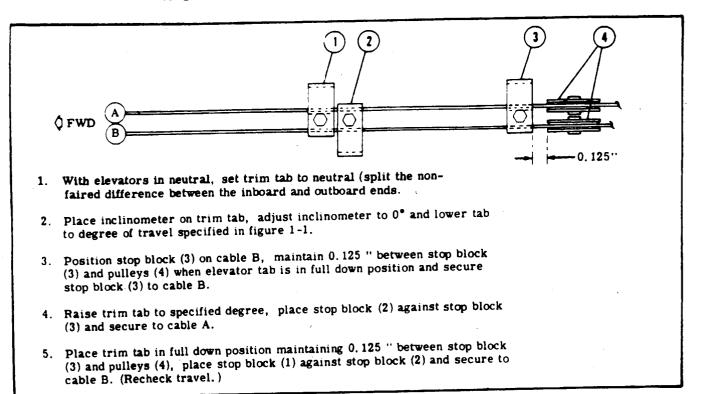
Elevator Trim Tab Travel Stop Adjustment
